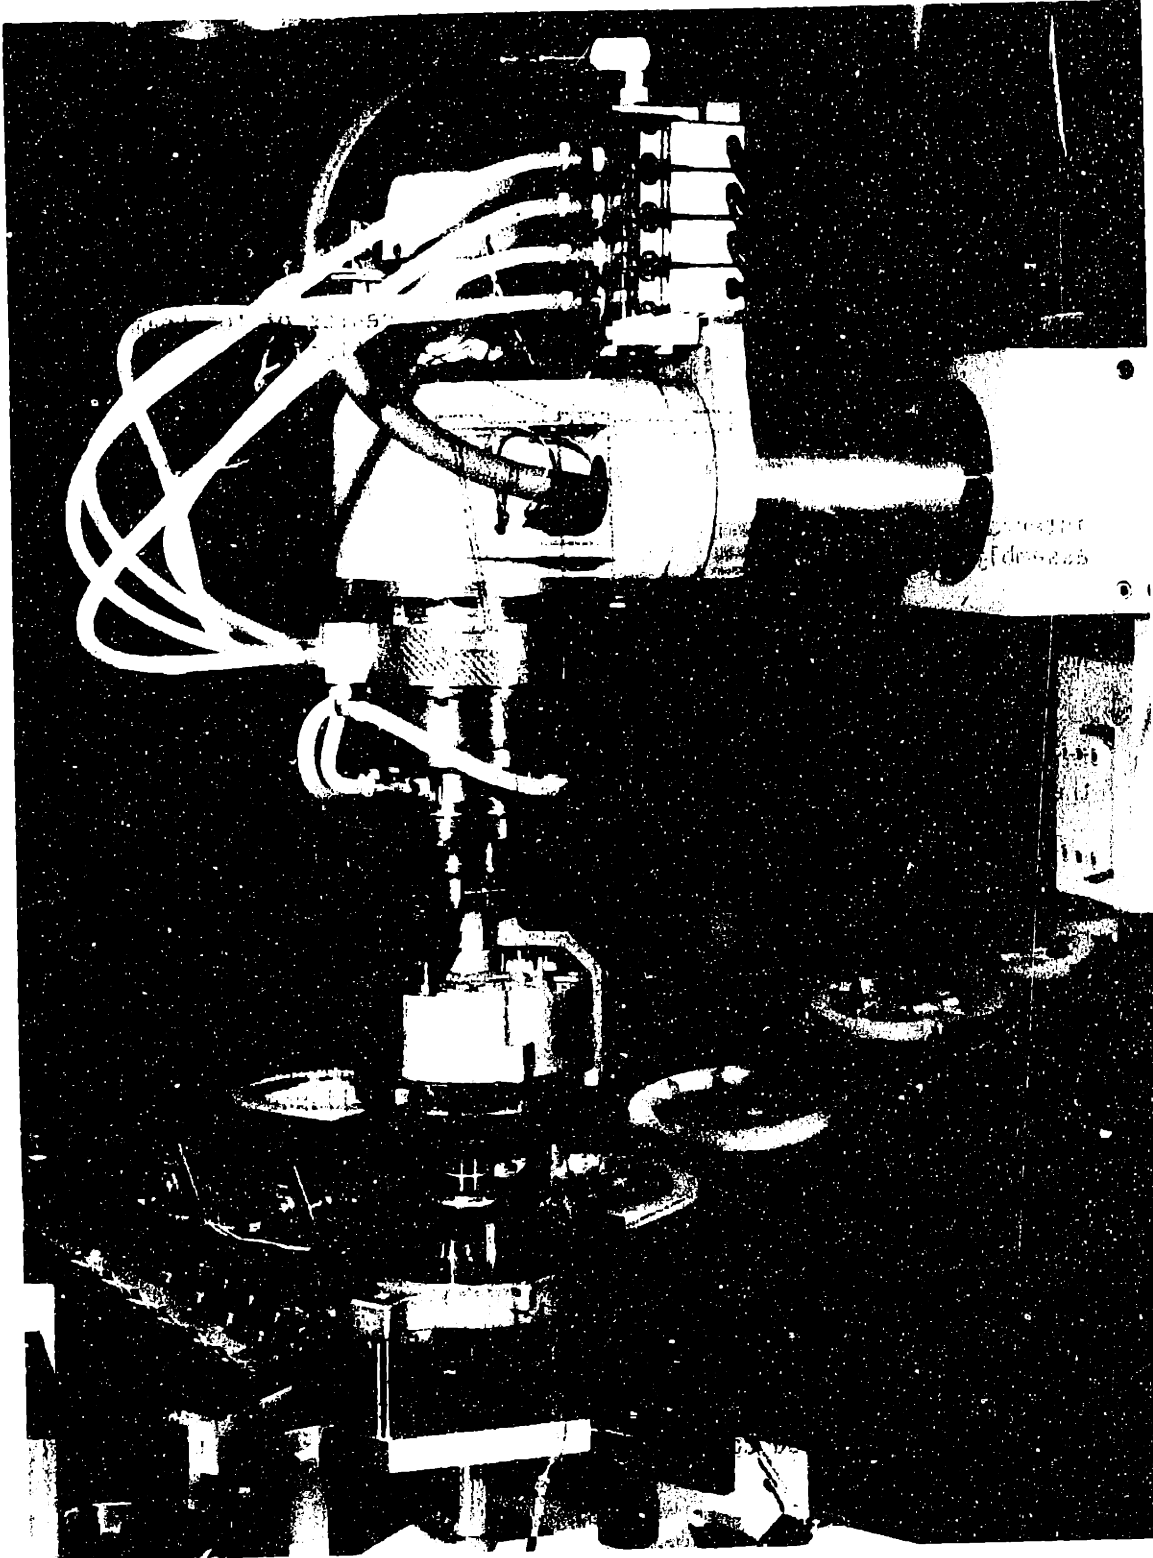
Photograph of the second compliance system mounted on the programmable assembly machine. The system is shown with a tool holding an alternator rear housing/stator subassembly.
